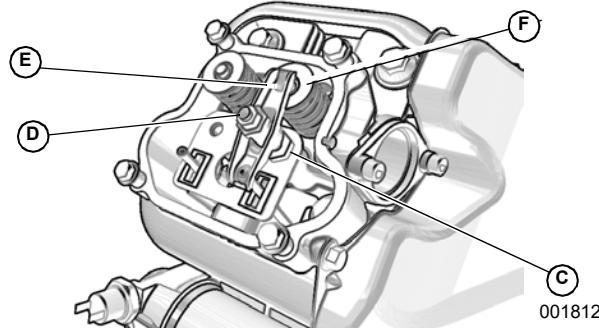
Valve Clearance Adjustment (9 kW - 426cc / 10 kW - 460cc engine)
